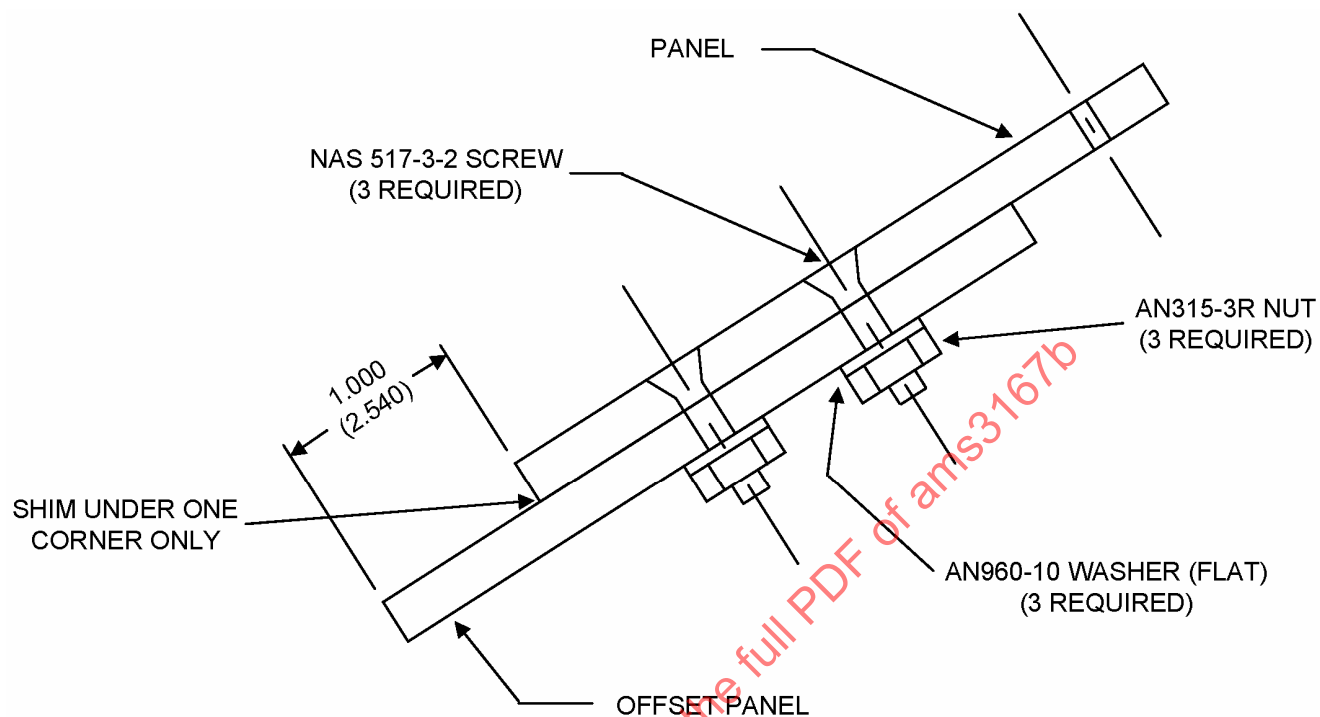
Coupling of Dissimilar Metal Test Panels
